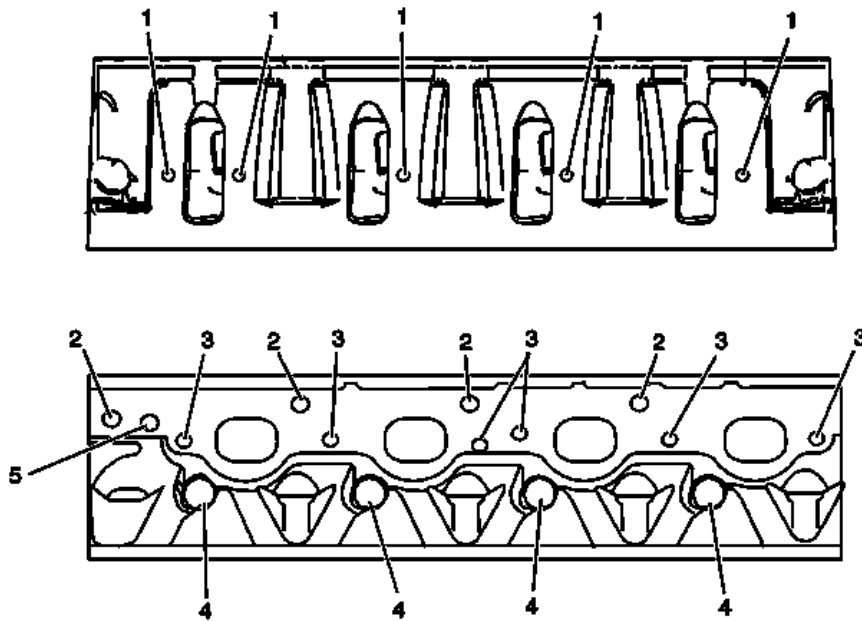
Cylinder Head - Intake/Exhaust Side Views
